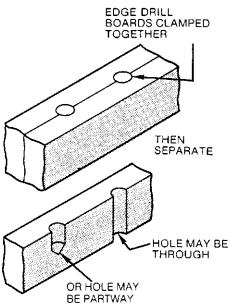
Semi-circular grooves, through or partway, are formed by edge drilling stock on the joint line of pieces that have been clamped together.
